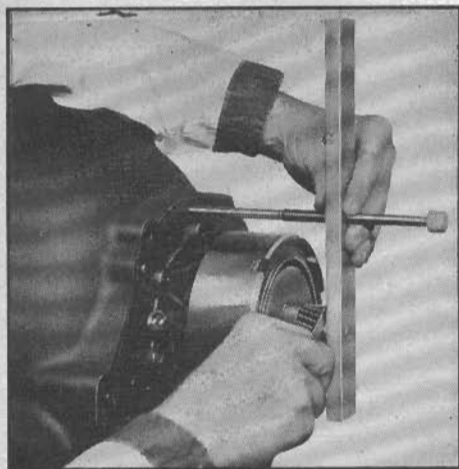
Checking for proper low to reverse sun gear clearance. 1950-59
